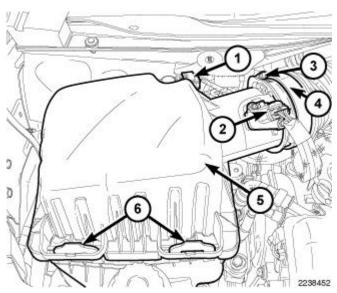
Intake Air Housing Courtesy of CHRYSLER LLC
